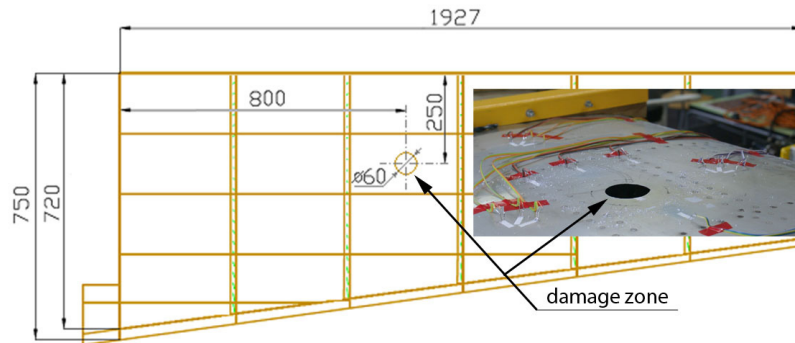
The geometry of the damage and view of the hole made in the upper skin of tail
